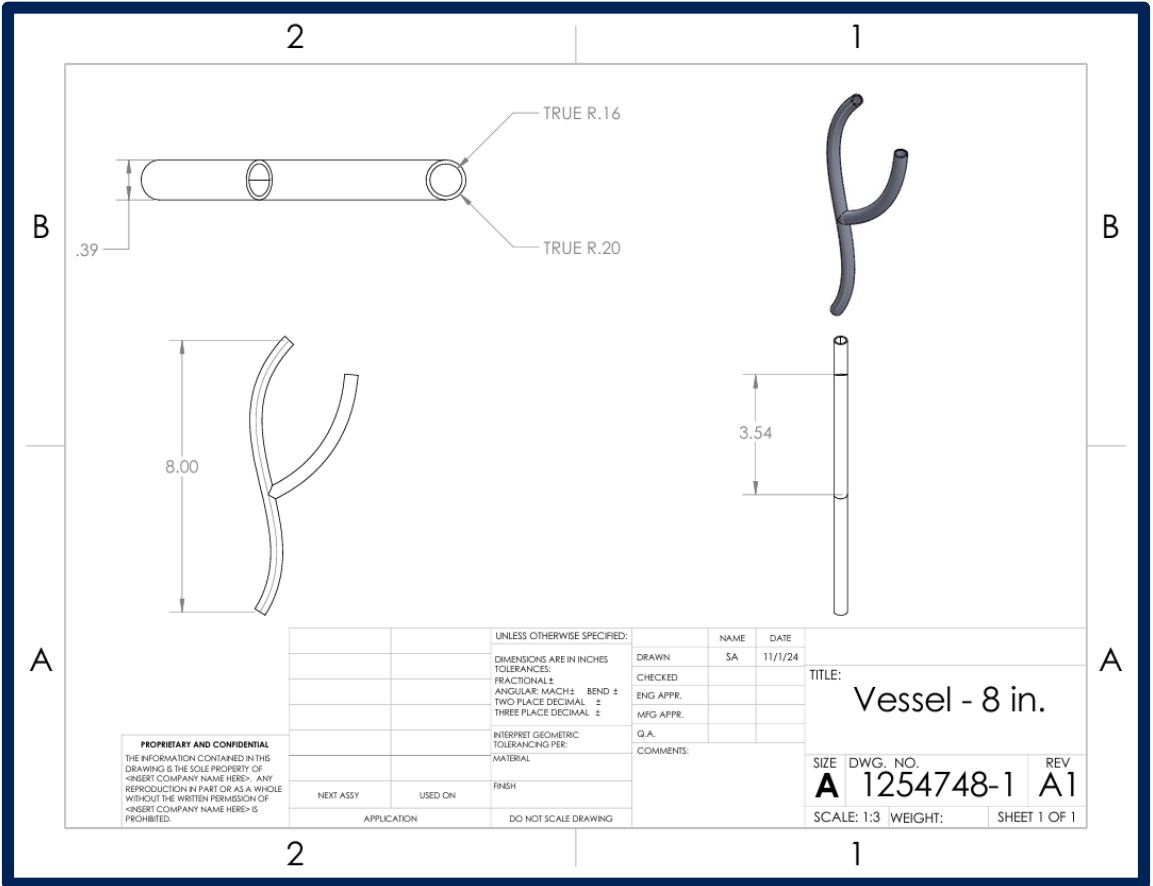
Drawing of Component [PN: 1358785-1A\_8 in. Vessel]
